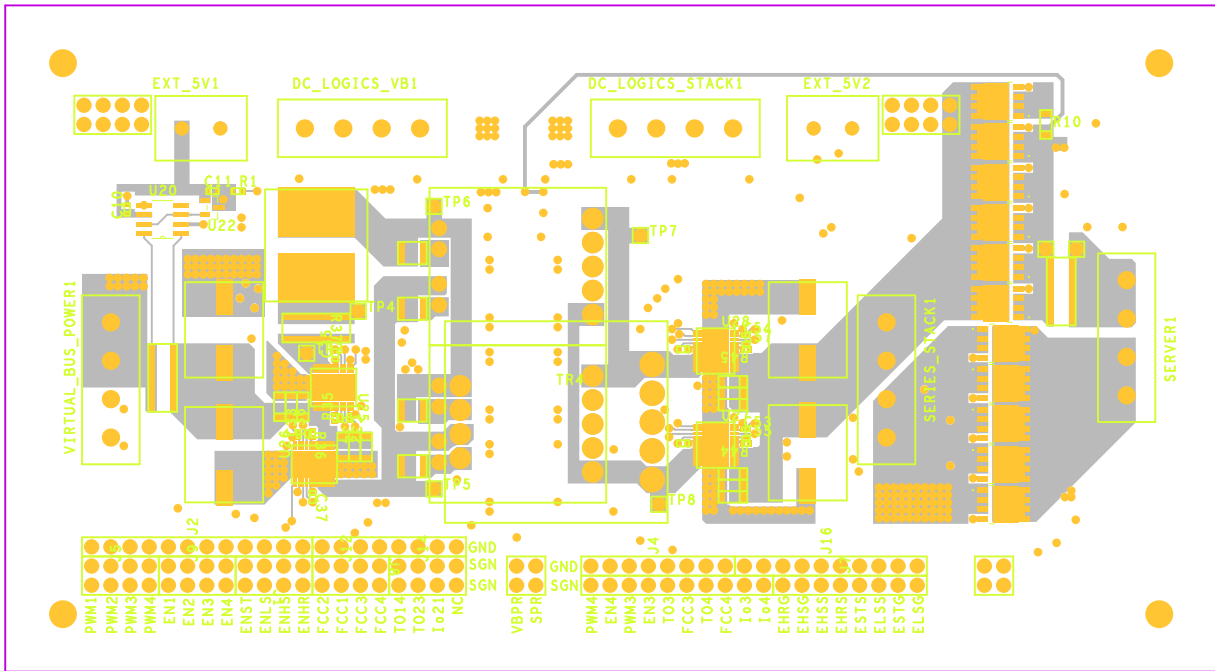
PCB layout of prototype DPP hardware: Top layer, silkscreen and solder mask.
